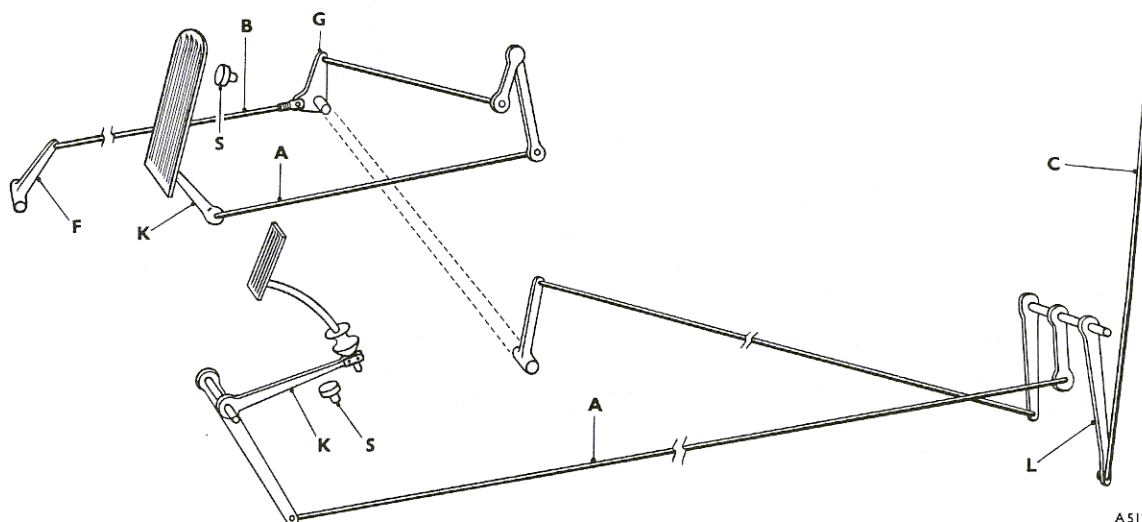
Throttle and T.V. control linkage — early S1 cars
